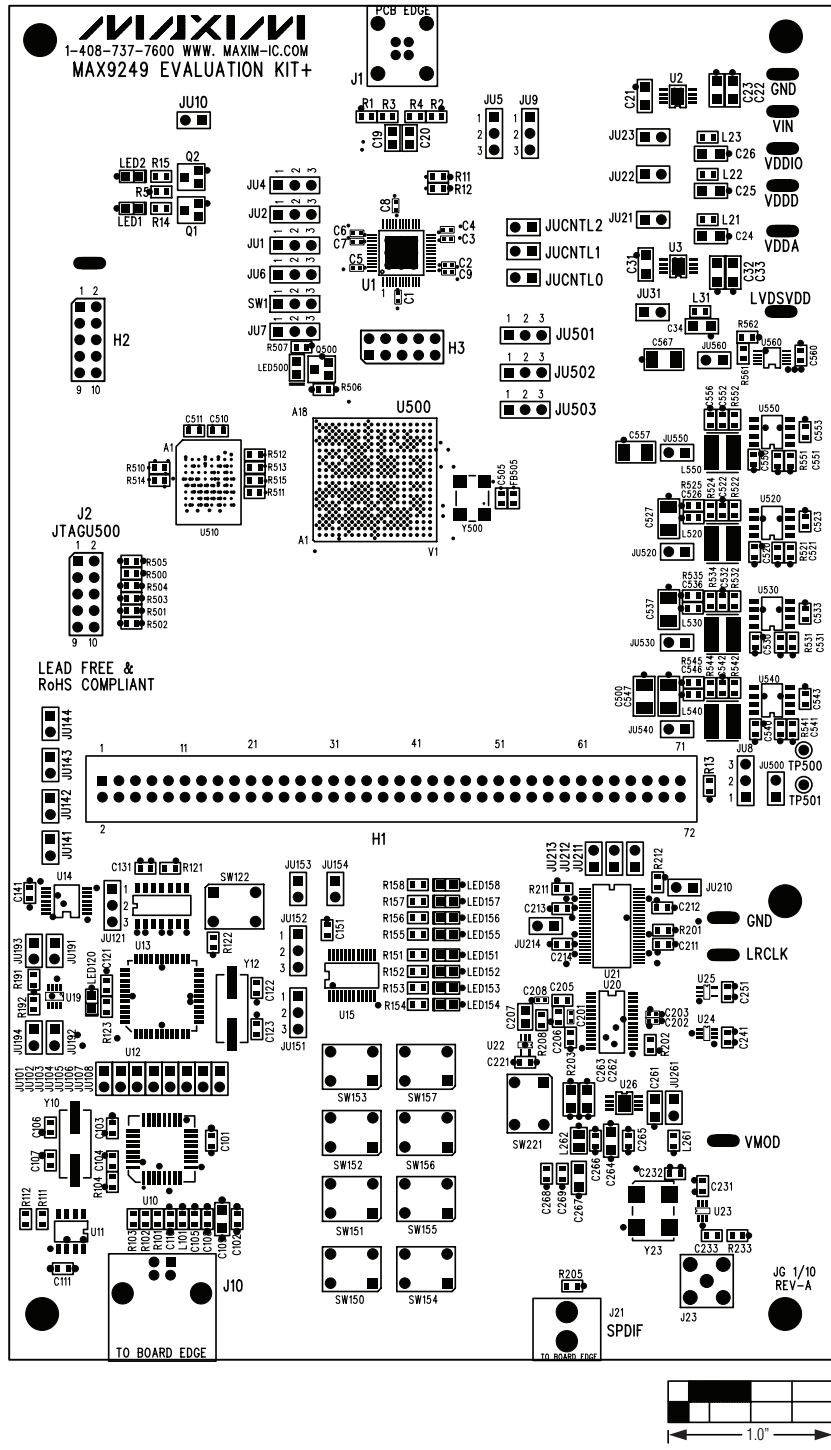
MAX9249 EV Kit Component Placement Guide—Component Side
